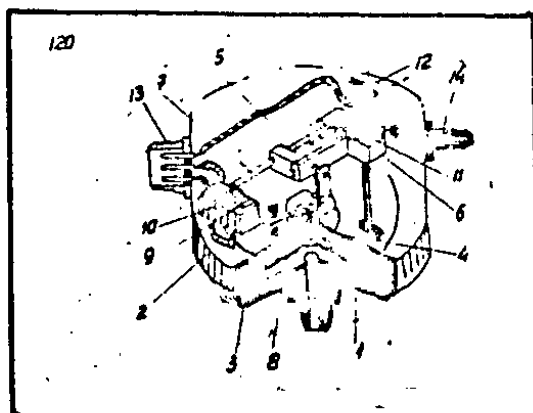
Kinematic System of Oil Pressure Gauge Pickup.
